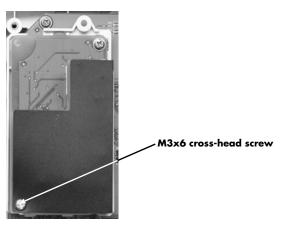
Remove one M3 X 6 cross-head screw
